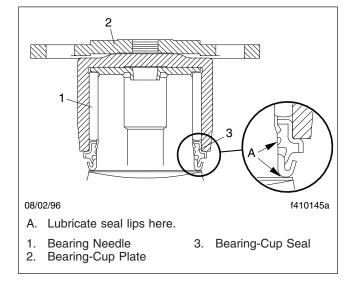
, Sectional View of a Full-Round Yoke U-Joint Bearing Cup
